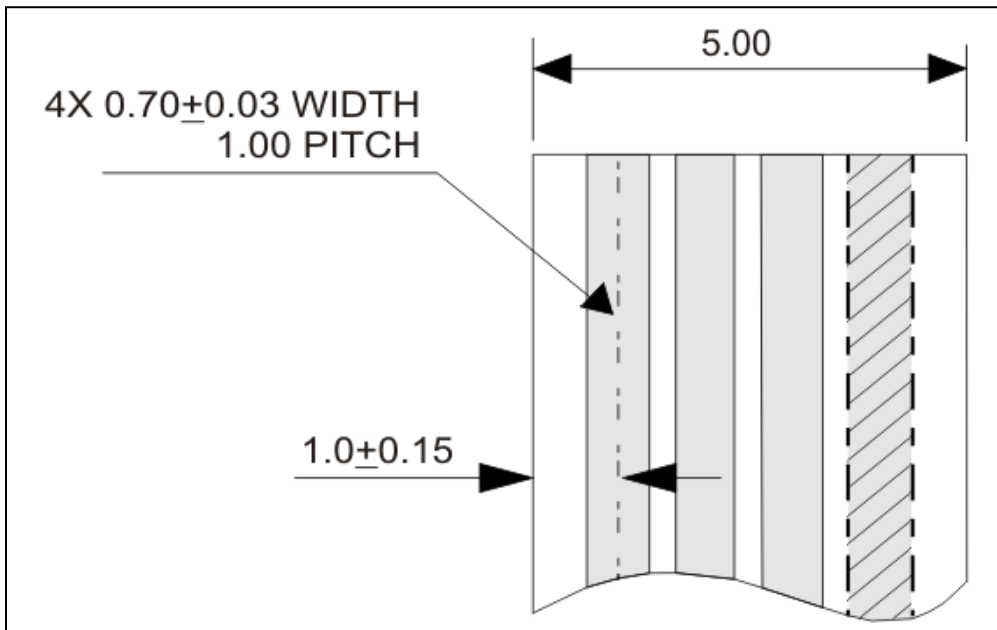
Top view of sensor tail. All dimensions are in millimeters.
